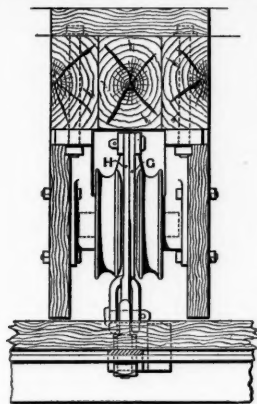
The Simonton Gear for Hopper Bottom Cars.
